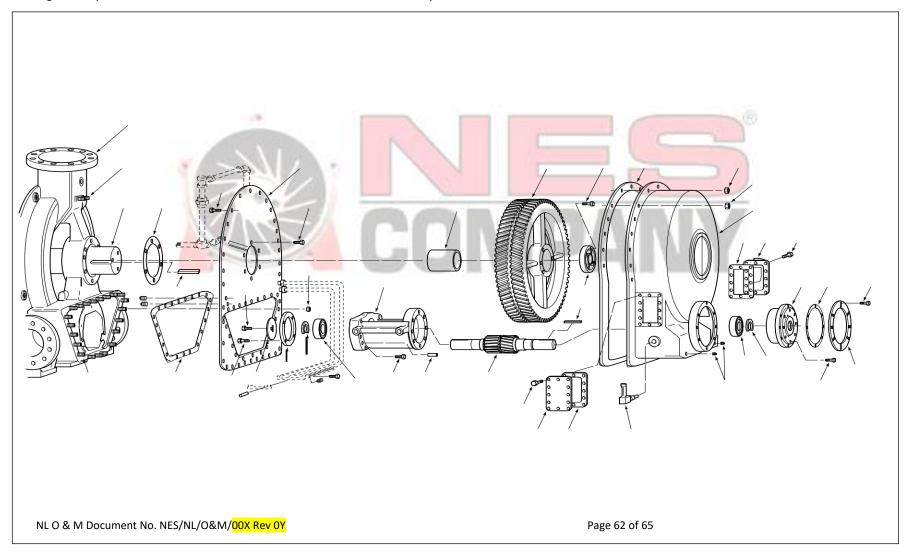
Exploded View of NES NL 6000 & NL 9000 Vacuum Pumps.
